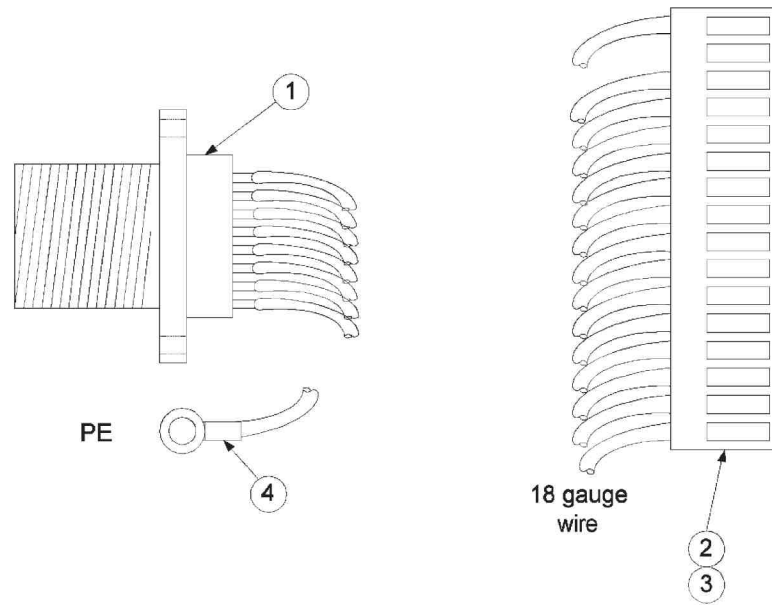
AVC REMOTE INTERFACE CABLE EXPLODED VIEW
